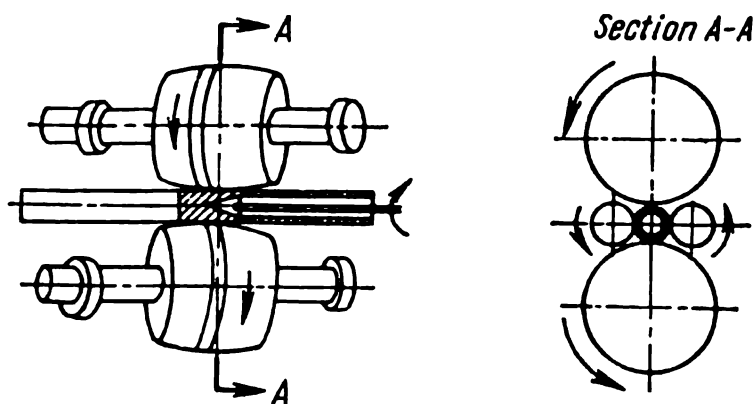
Piercing the tube billet in a barrel-type roll piercing mill to obtain the shell
